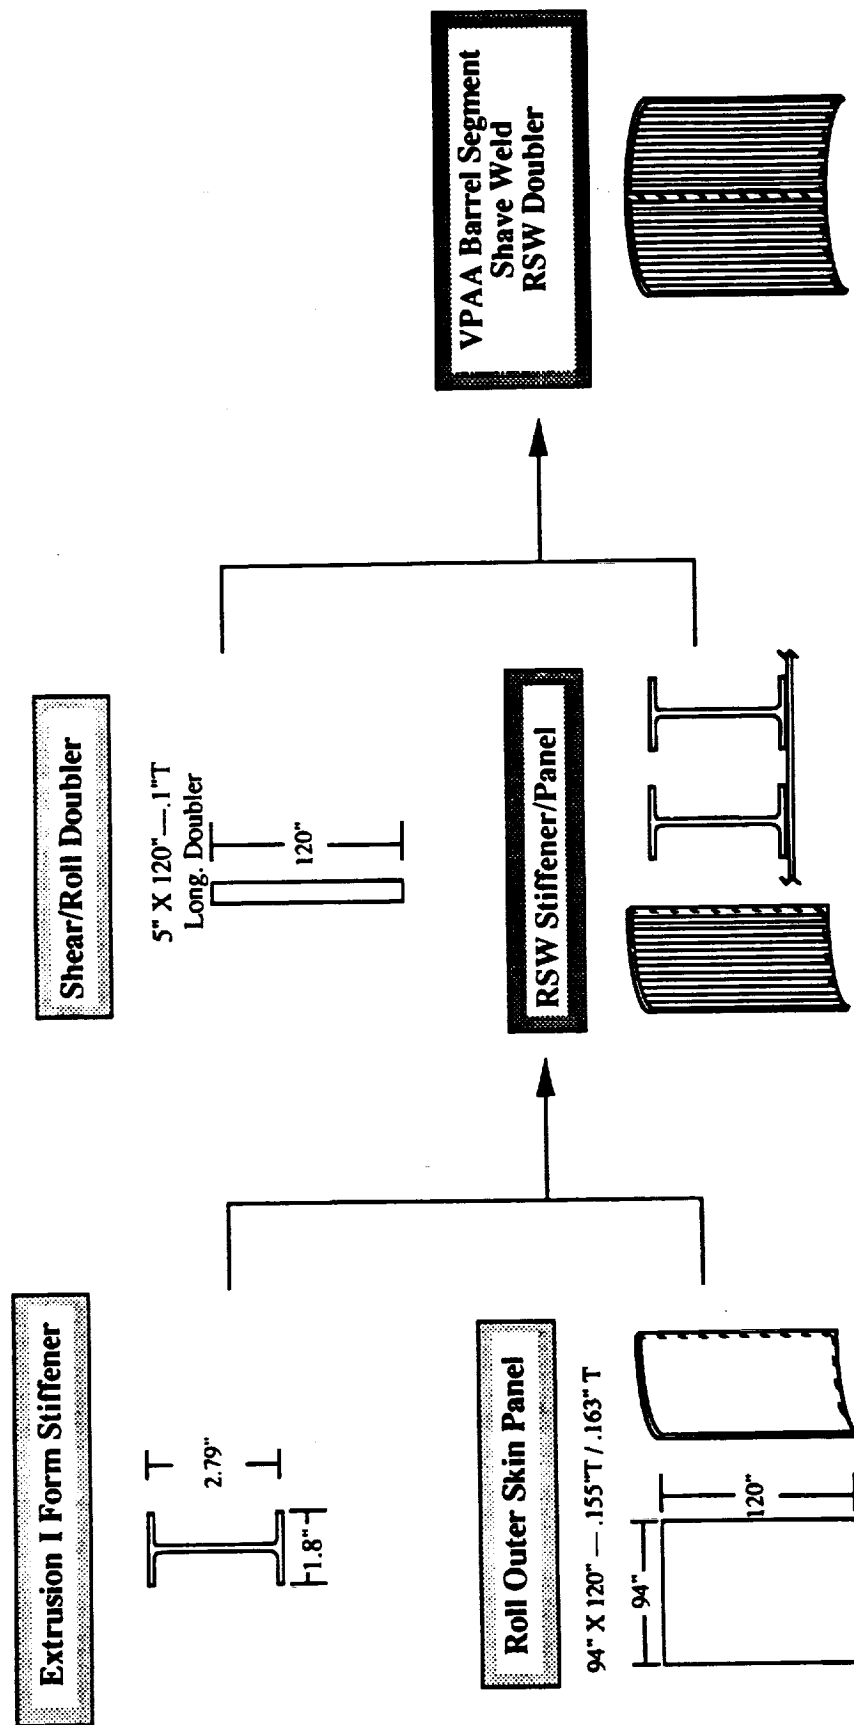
Manufacturing Process Flow for 2090 Al-Li or 2219 Al "I" Extrusion Stiffener Components and Assembly Into Barrel Sections.
